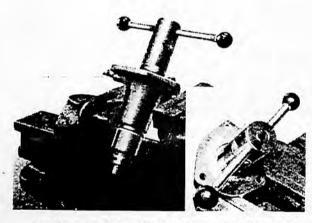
RECUTTING CONTACT BEARING FACE (23C and 87 mm. ENGINES).
